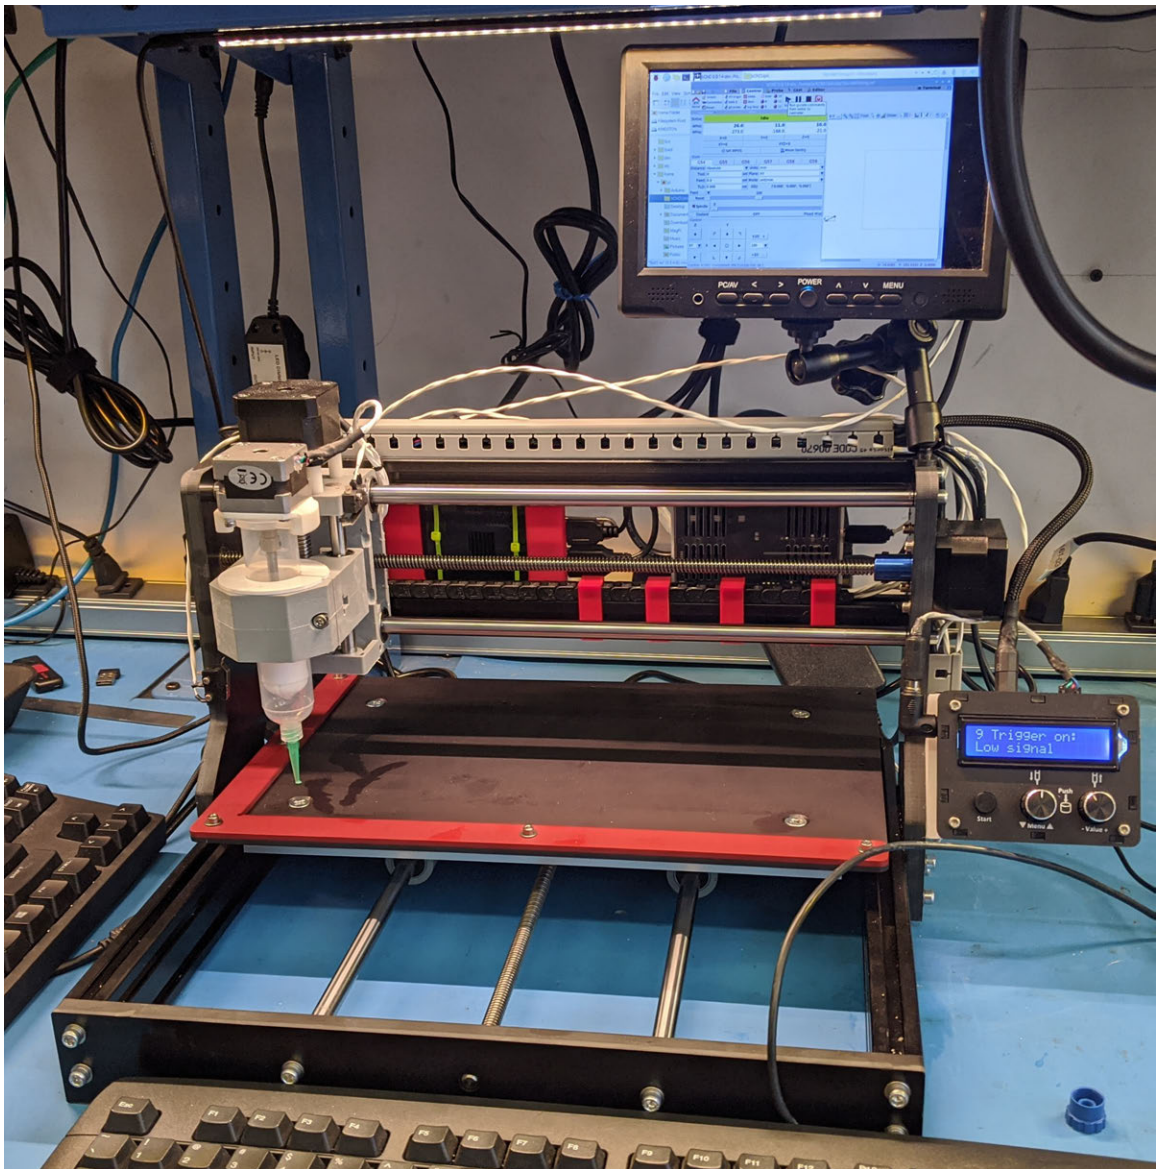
DIY CNC solder paste dispenser built on an inexpensive CNC engraver platform.
